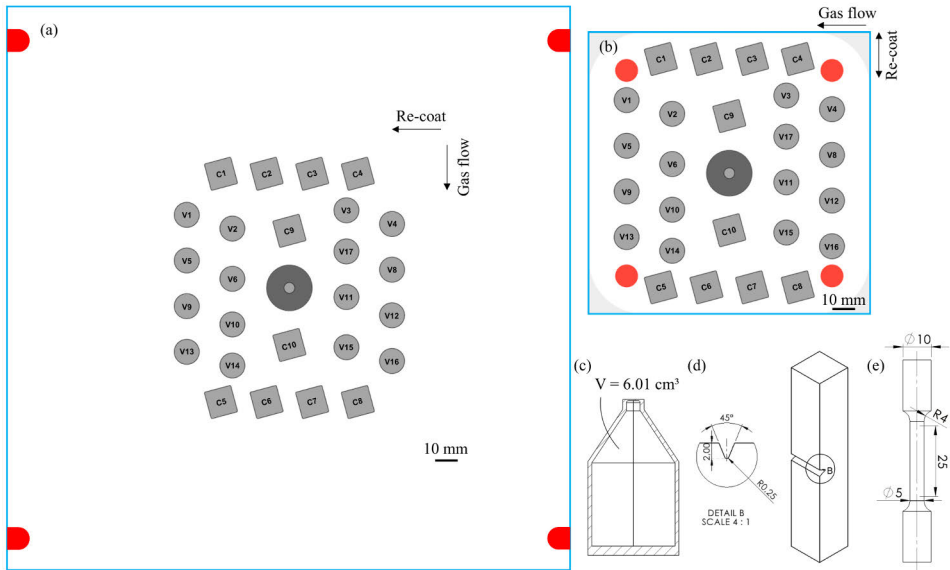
Build layouts in Publication II: specimen placement on the (a) EOS M290 and (b) SLM 125 building platform, and (c-e) test specimen geometries and dimensions of main features.
